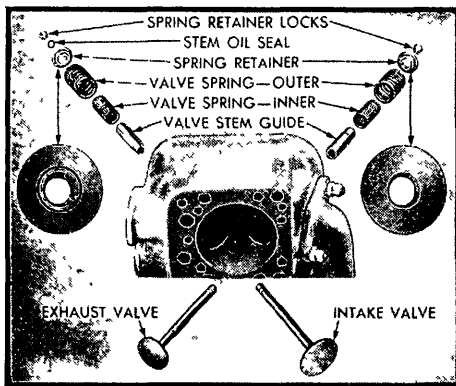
Chrysler and De Soto V8 valve details. 1951-52
